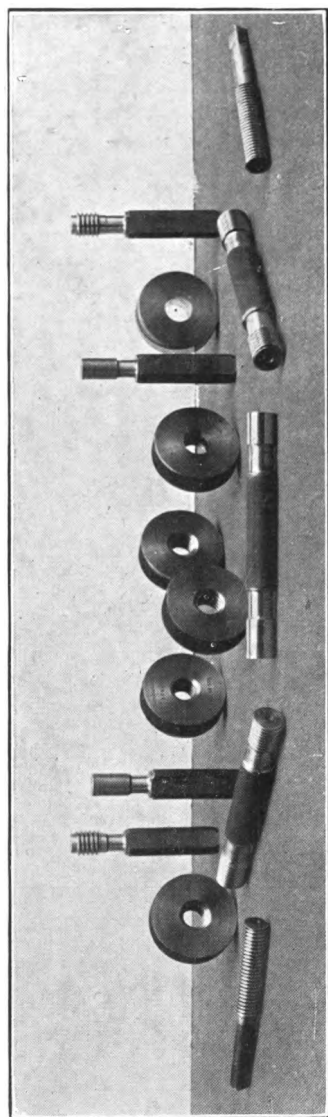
A SET OF GAUGES AND CHECKS FOR INSPECTION OF TAP DIAMETERS.
